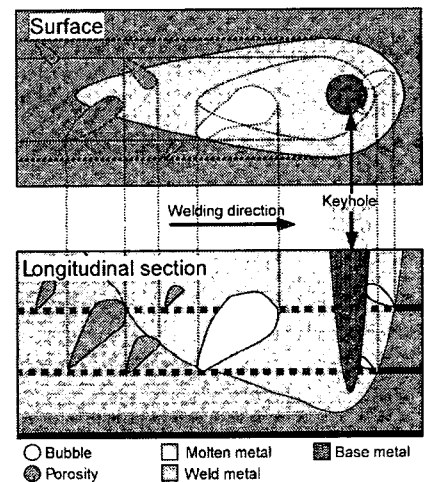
Porosity formation mechanism in lap welding of primer-coated steel
